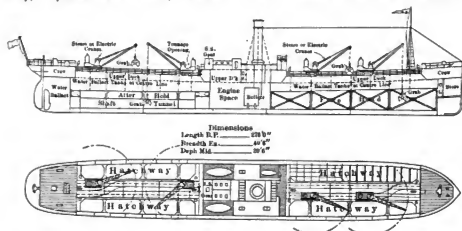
GENERAL ARRANGEMENT OF CENTRAL DECK BALLAST TANK STEAMER
